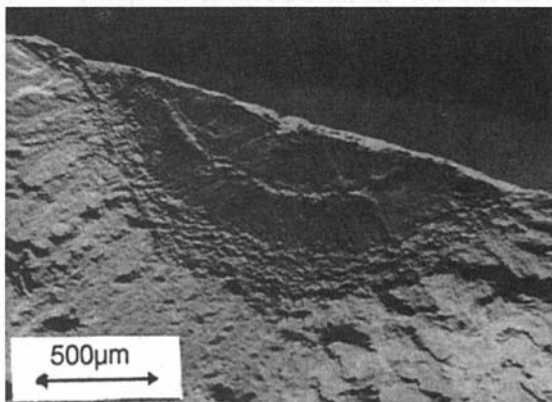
Fracture surface of bare specimen showing penny-shaped crack propagation
